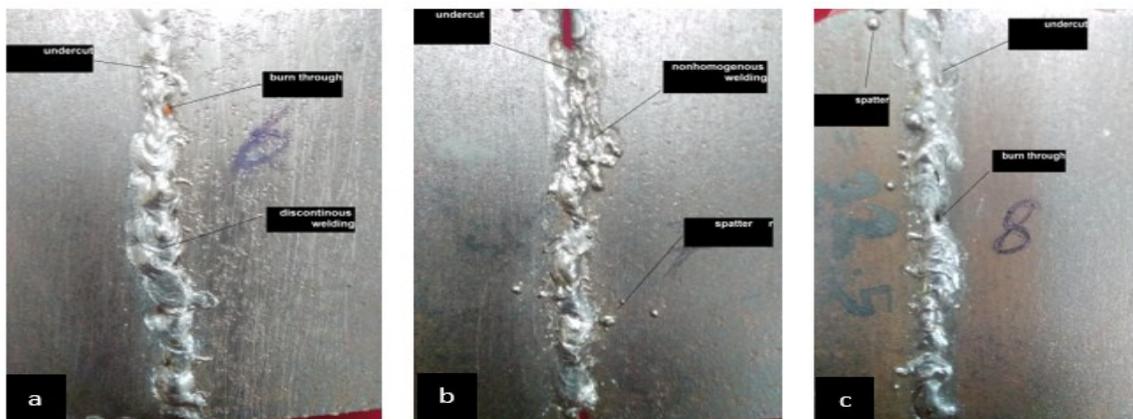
Show welding defects at (a) A=255, S=123 (b) A=260, S=112 (c) A=260, S=118.
